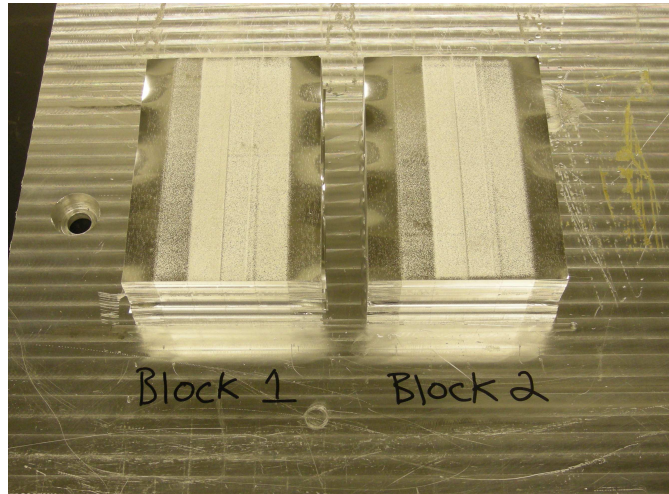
Photograph of UAM built blocks of aluminum that fatigue samples were machined from.
